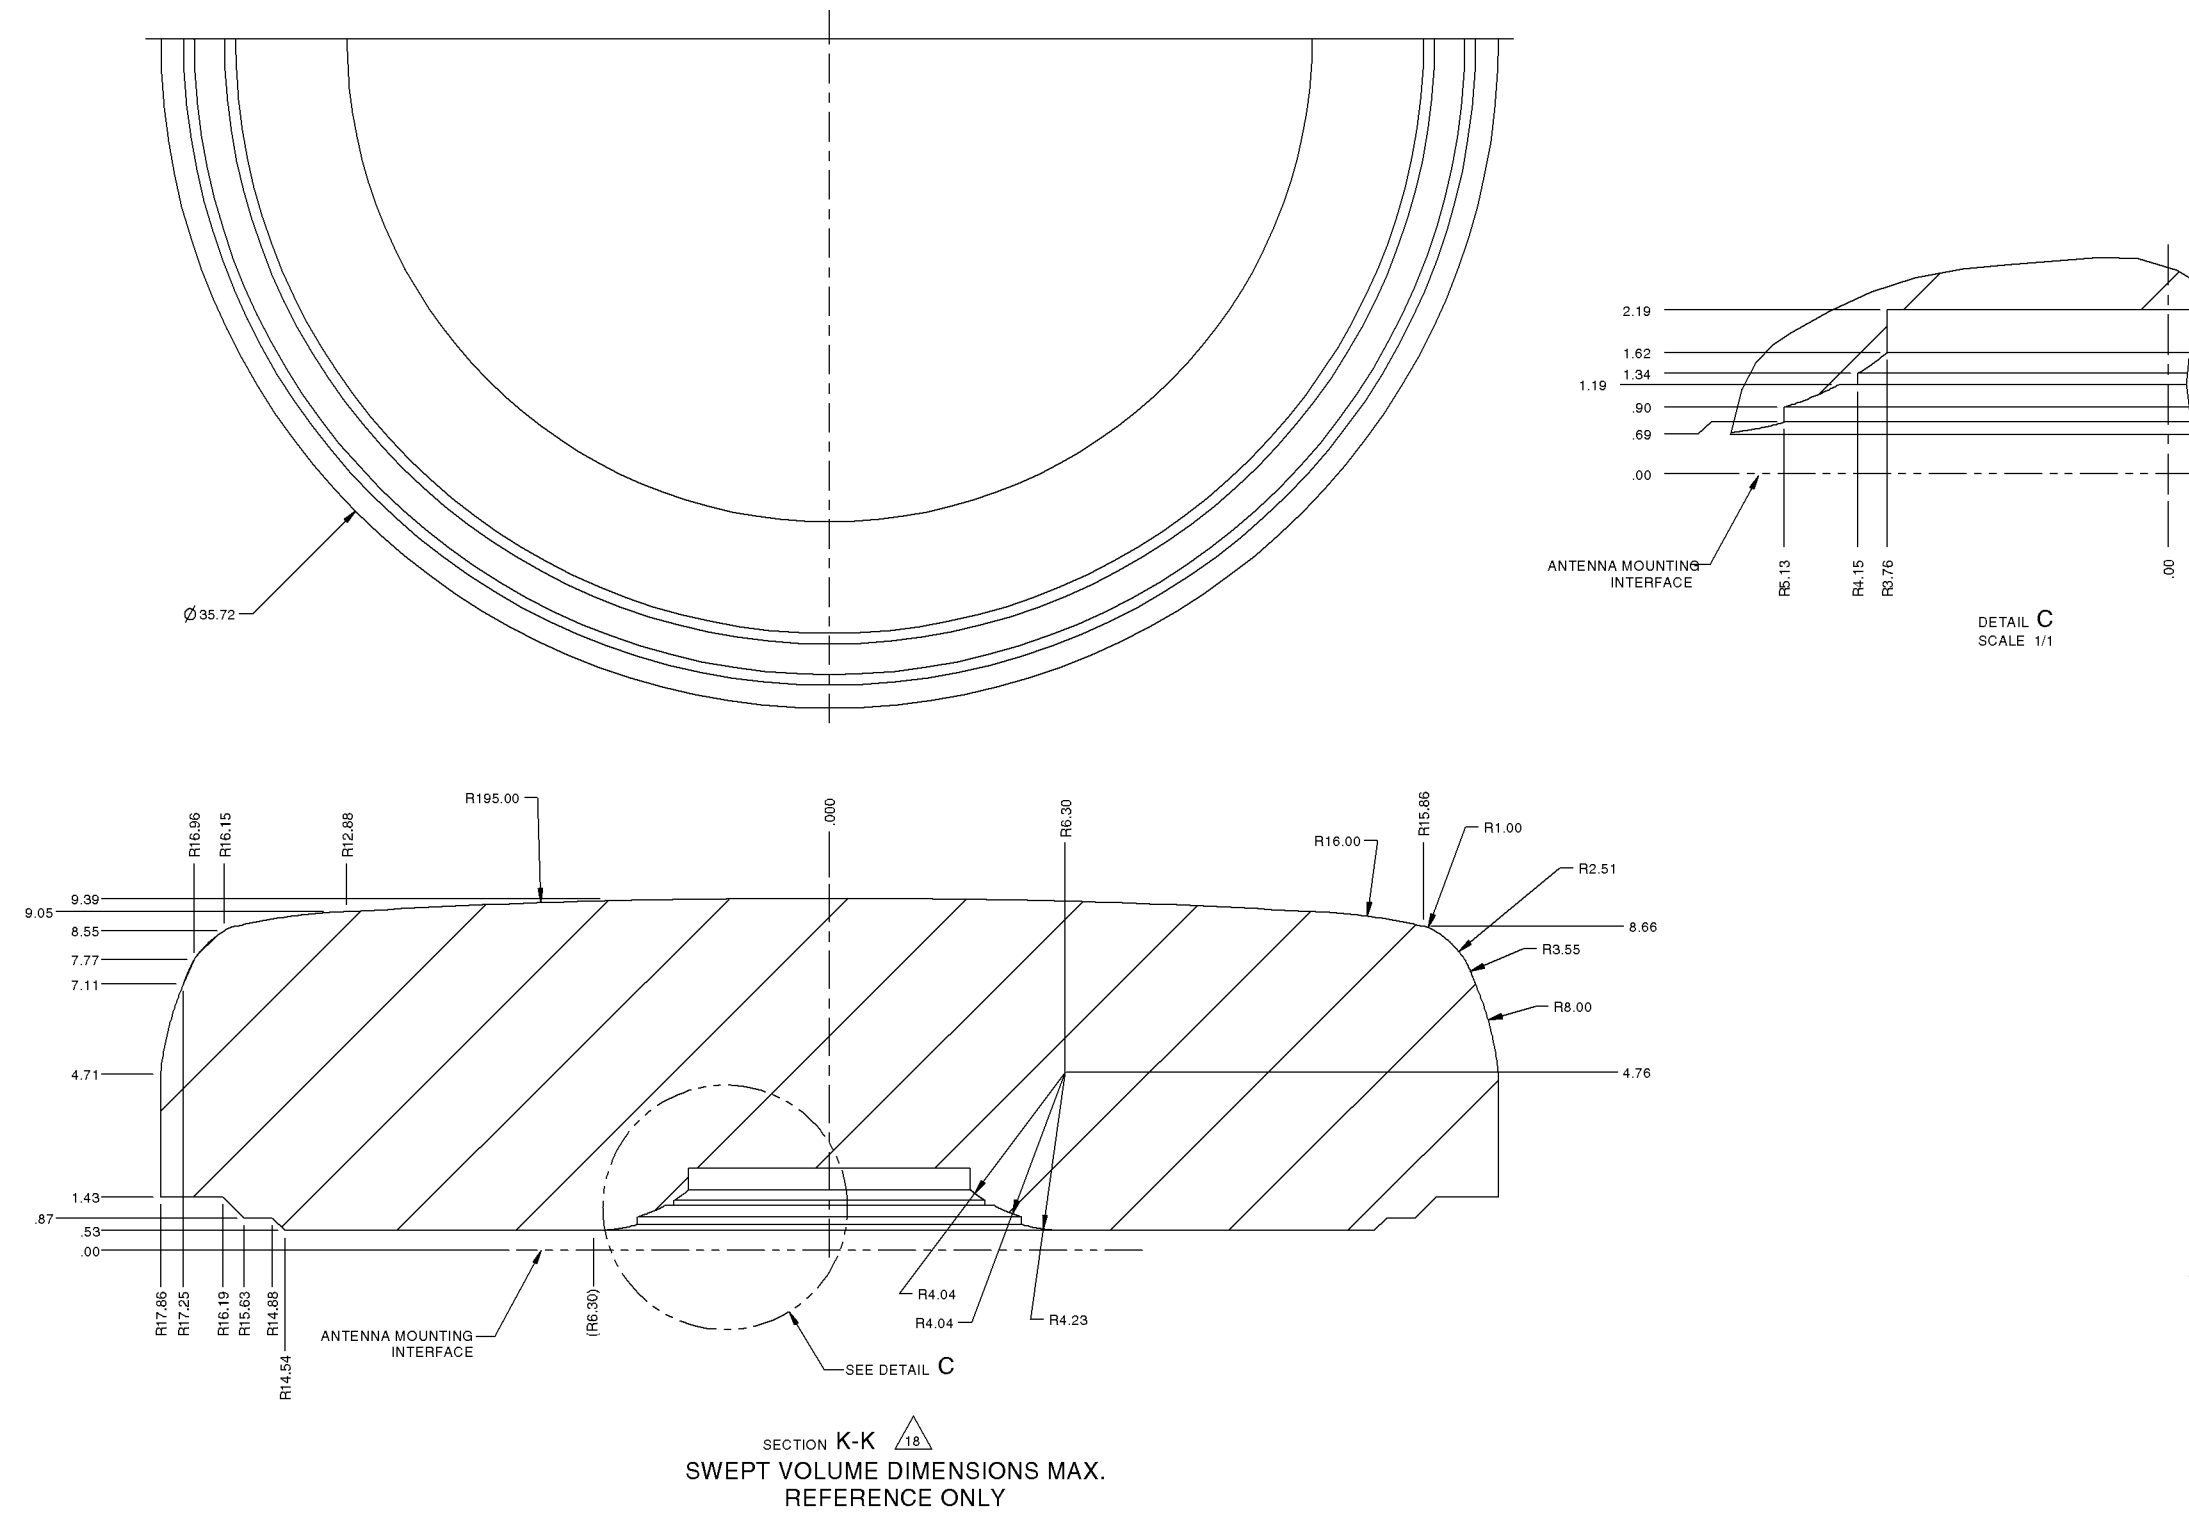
(Sheet 7 of 14) FMA Outline and Installation Drawing (90000380ICD, REV L)
